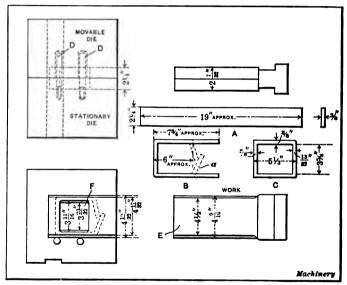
Forging Machine Dies and Tools for making Locomotive Spring Bands
